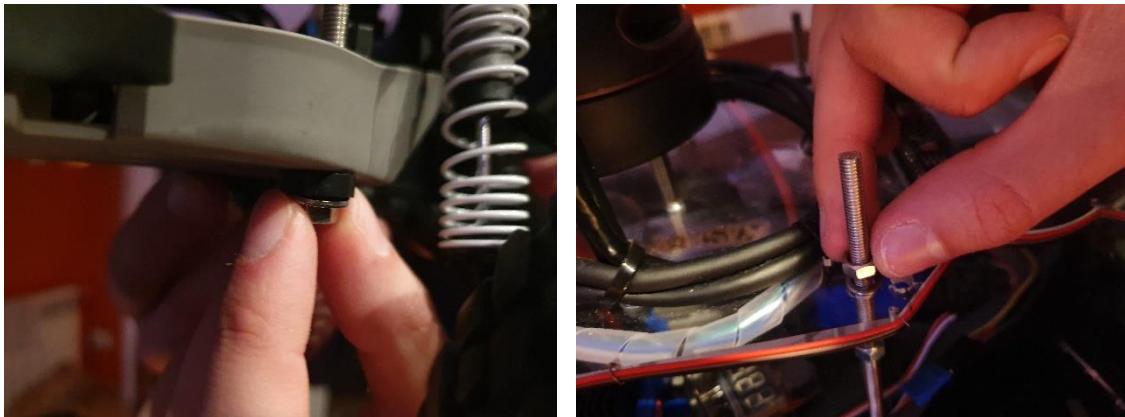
Rods attachment to chassis (left) and methacrylate plaque (right)
